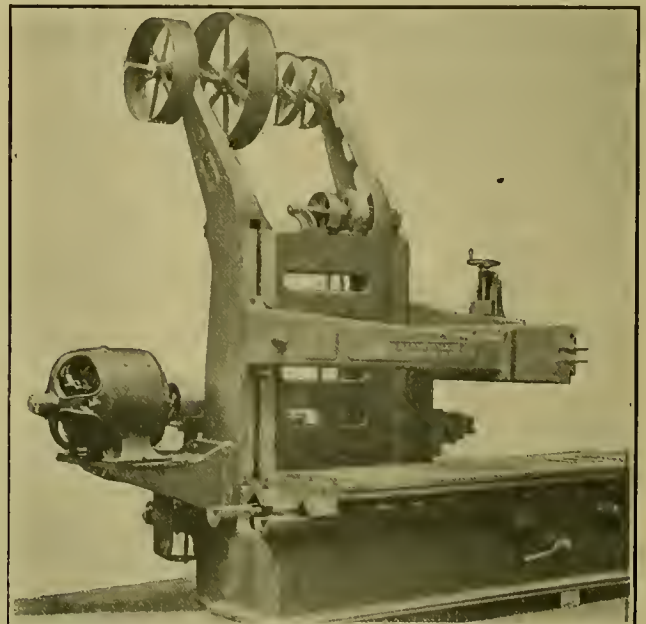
THE TYPE OF INDIVIDUAL DRIVE (BELTED) USED UPON THE SMALLER SIZES OF OPEN-SIDE PLANERS BY THE DETRICK & HARVEY MACHINE COMPANY.—GENERAL ELECTRIC MOTOR.
